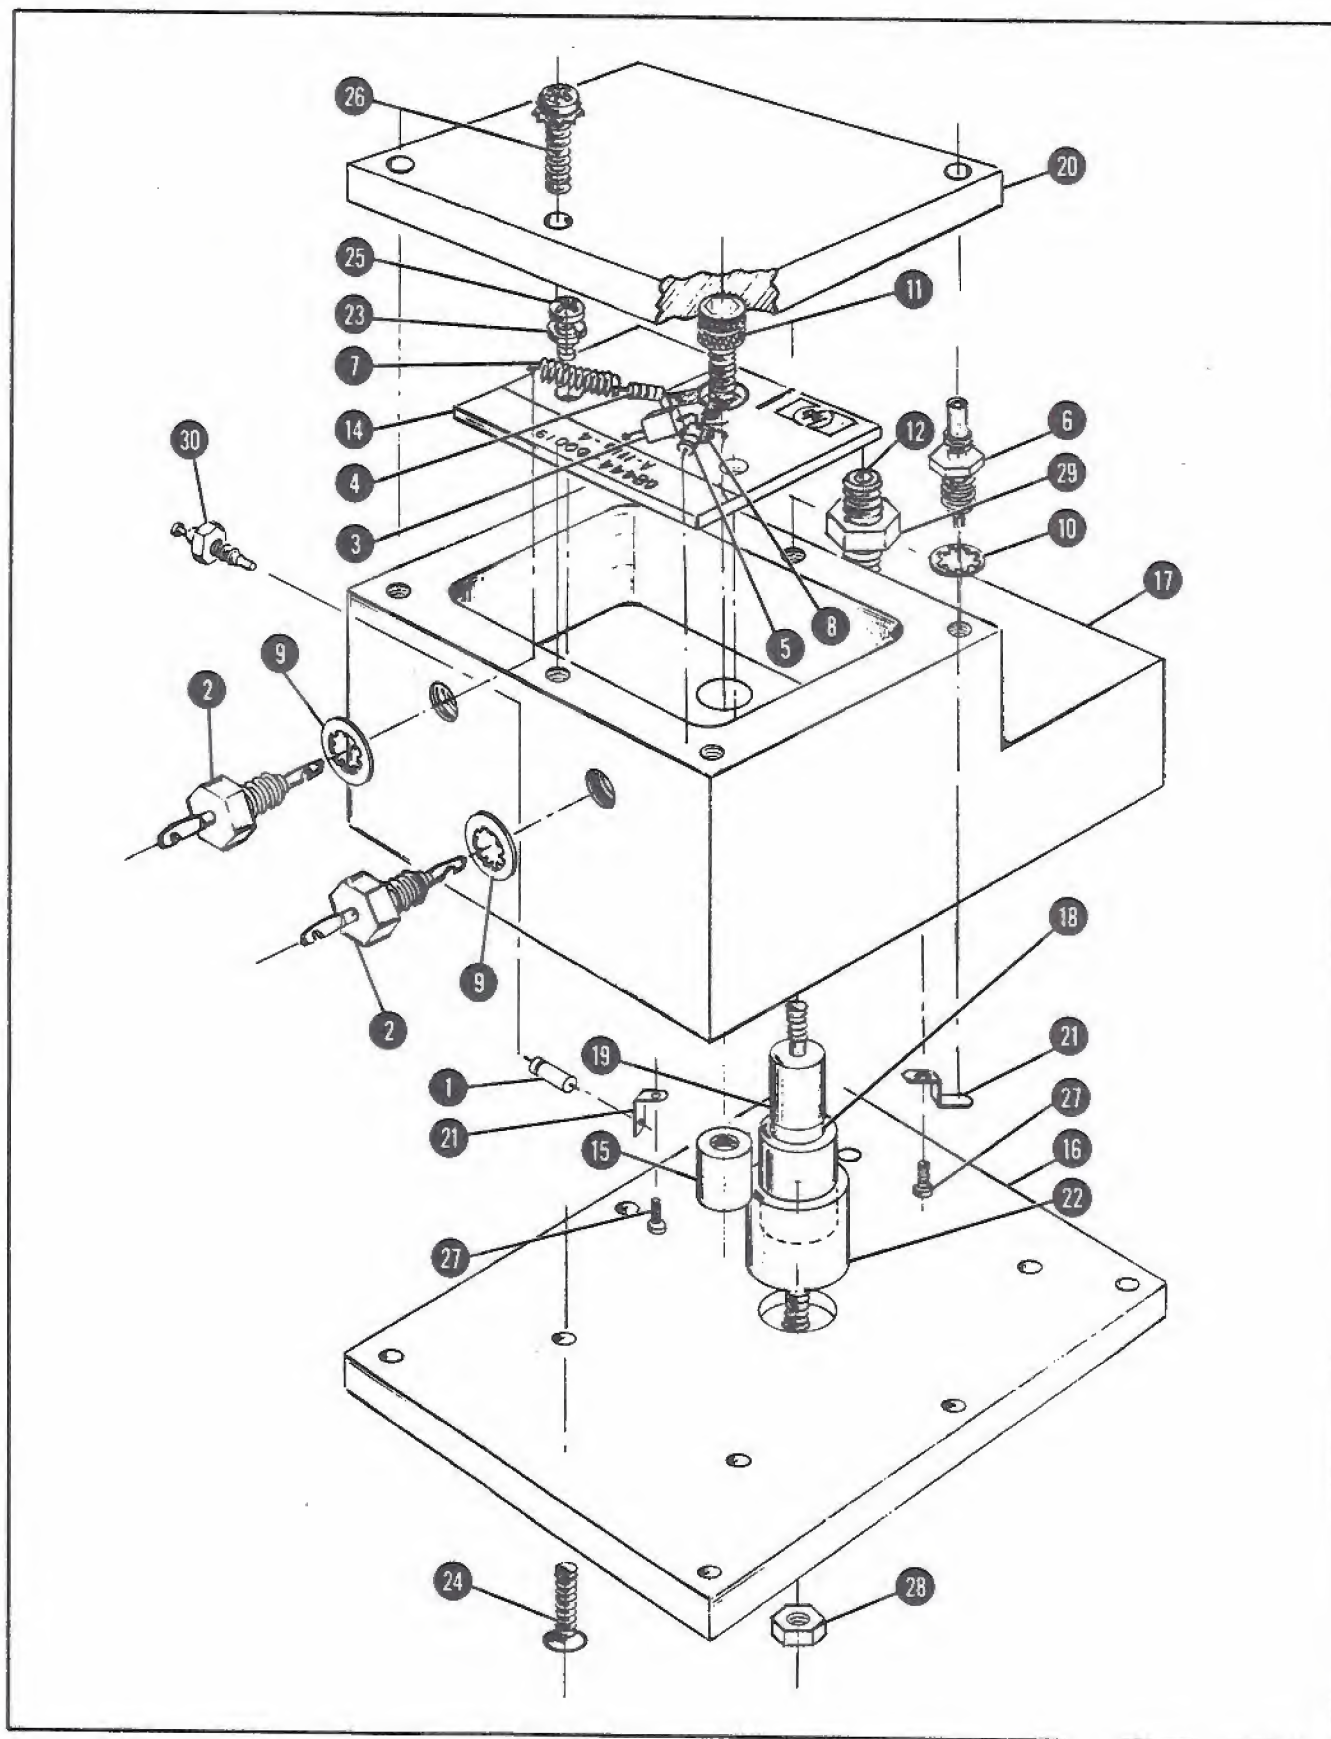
A7 1.55 GHz Oscillator Assembly, Illustrated Parts Breakdown (1 of 2)
